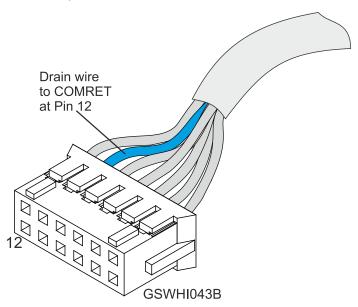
Feedback and Shrouded Control Cable Assemblies – Example
